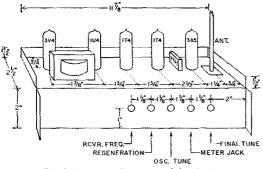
Principal dimensions of the chassis for the 50-Mc, transceiver.
